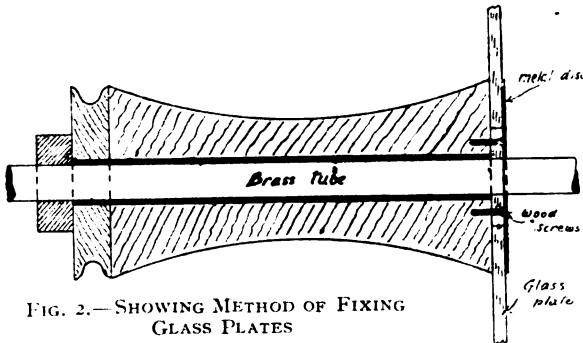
SHOWING METHOD OF FIXING GLASS PLATES
